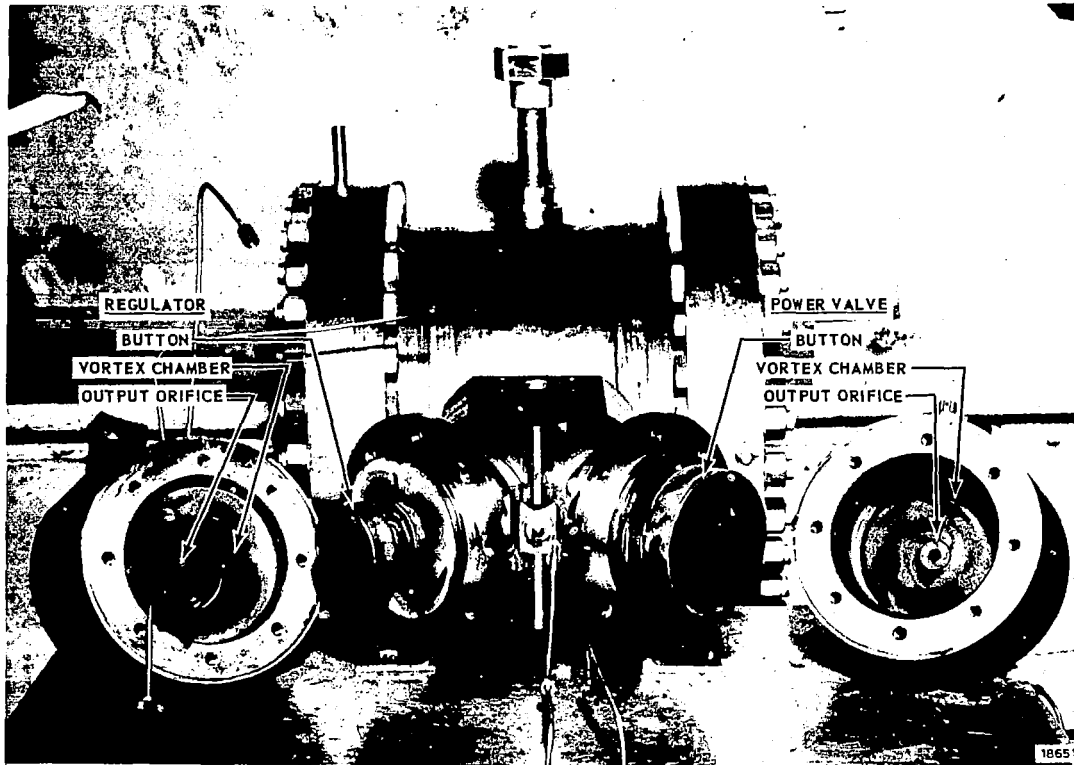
Internal Parts after Hot-Gas Test No. 2
